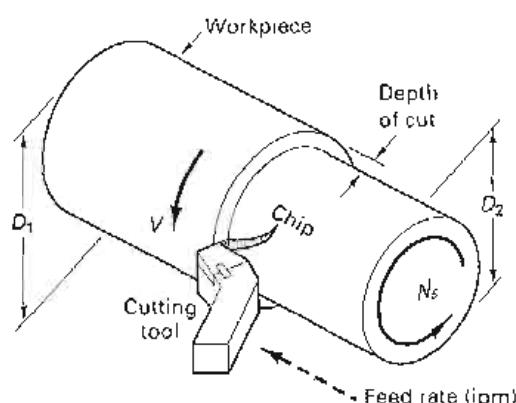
Turning a cylindrical workpiece on a lathe requires you to select the cutting speed, feed, and depth of cut.
